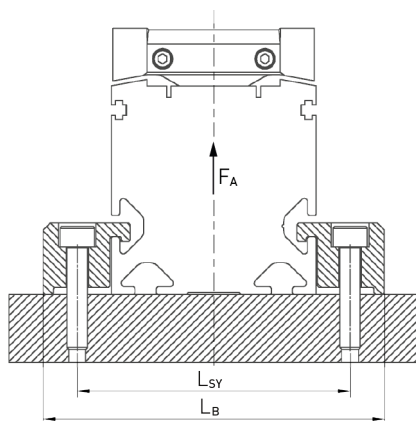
Hole spacing for lateral mounting of double axes HD with clamping profiles
